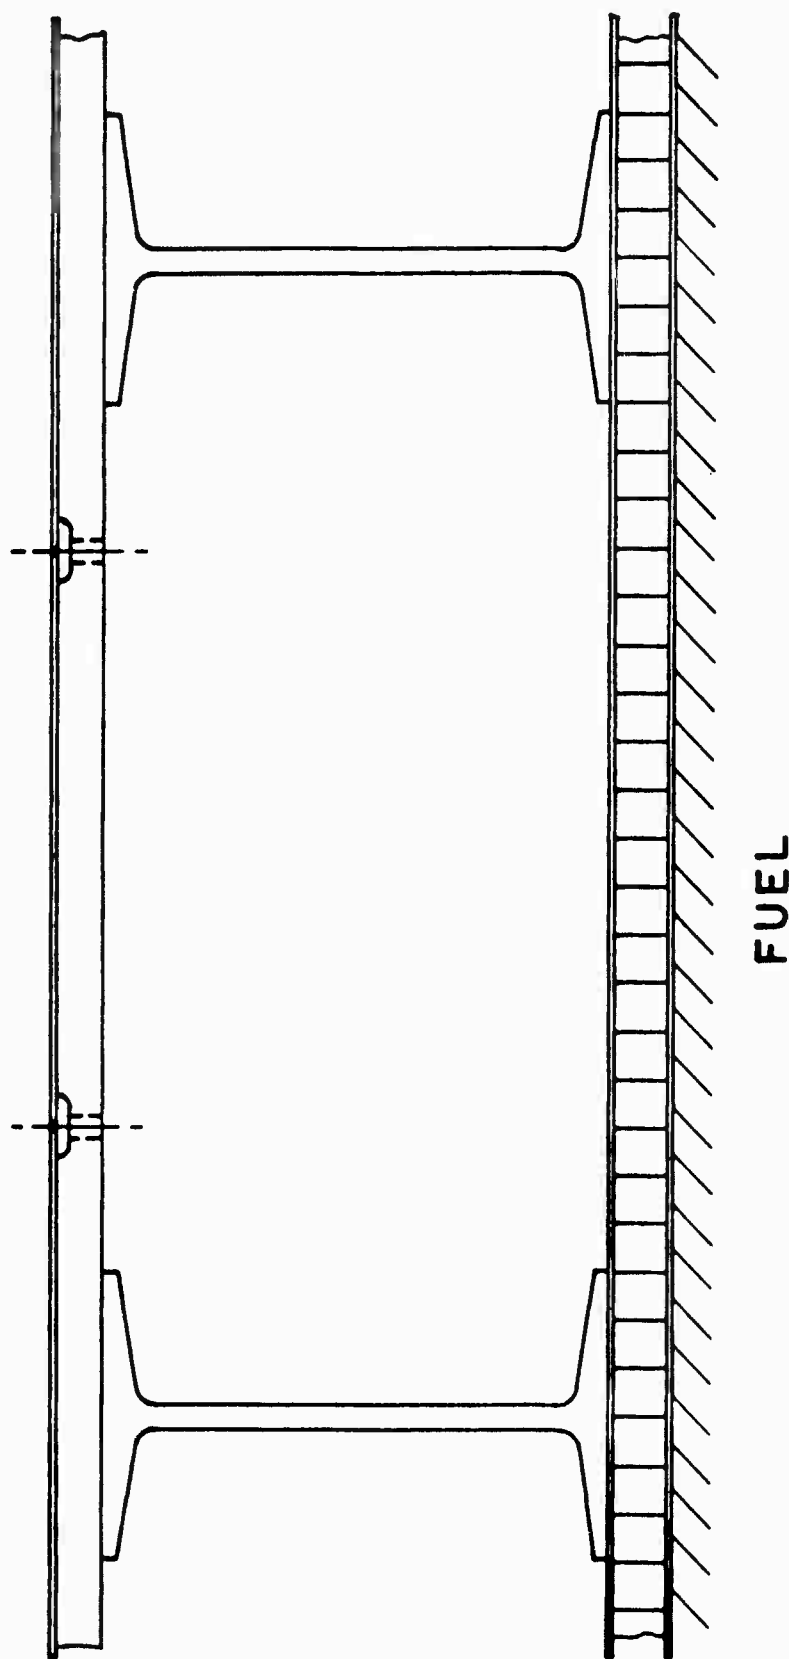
ALL BONDED UPPER AND LOWER SKIN ASSEMBLY
